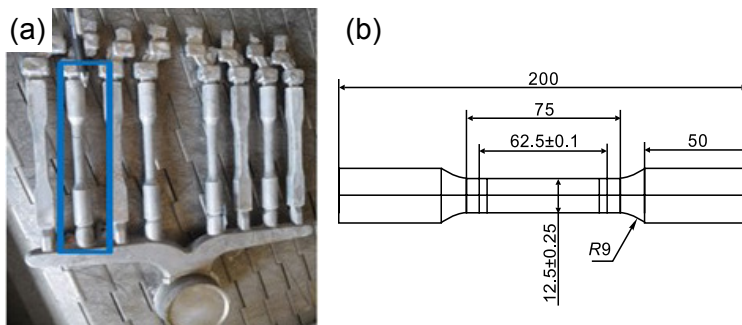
Obtained casting with the sampling location marked (a) and dimensions of tensile bar (mm) (b)
